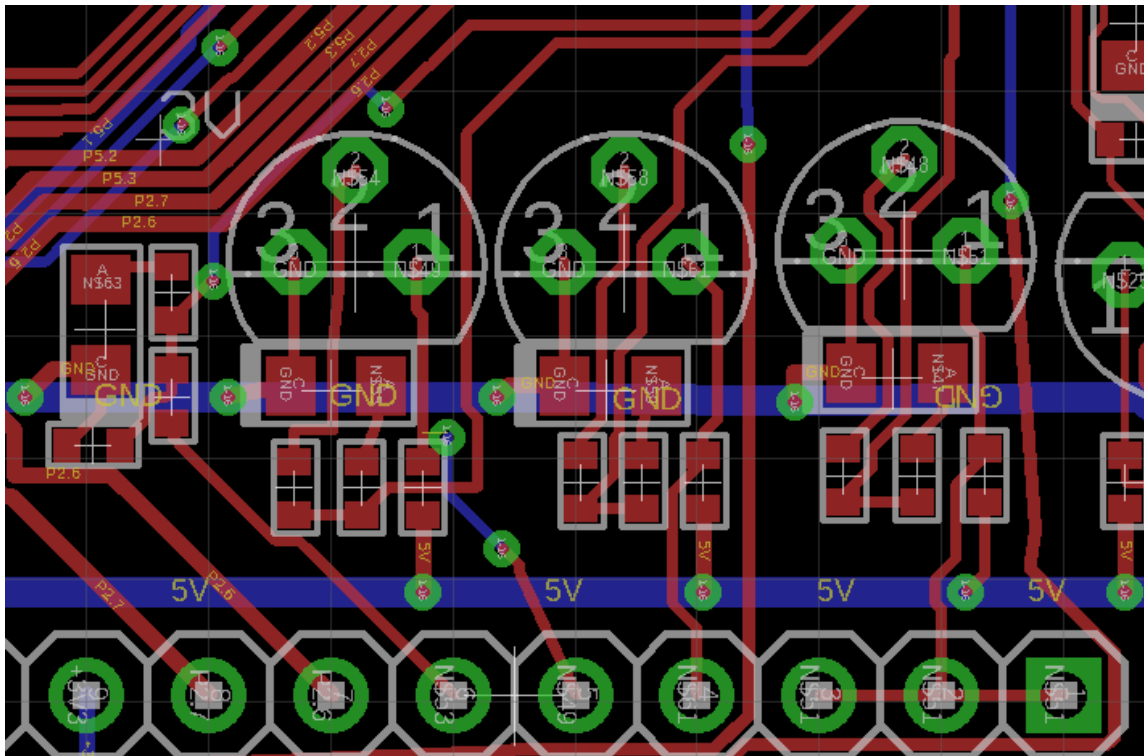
Sensor, Encoder, and Speedometer Interface Board Layout.
